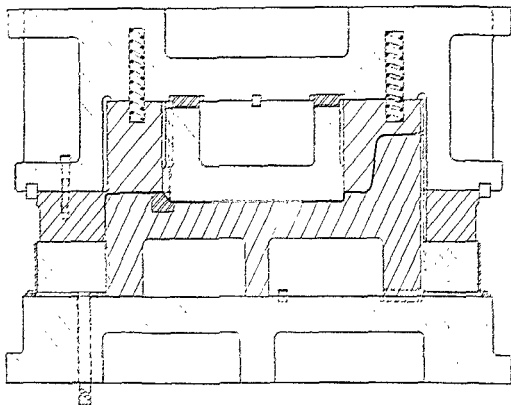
Die to draw flanges and restrike recess in washer top. (General Electric Co.)
